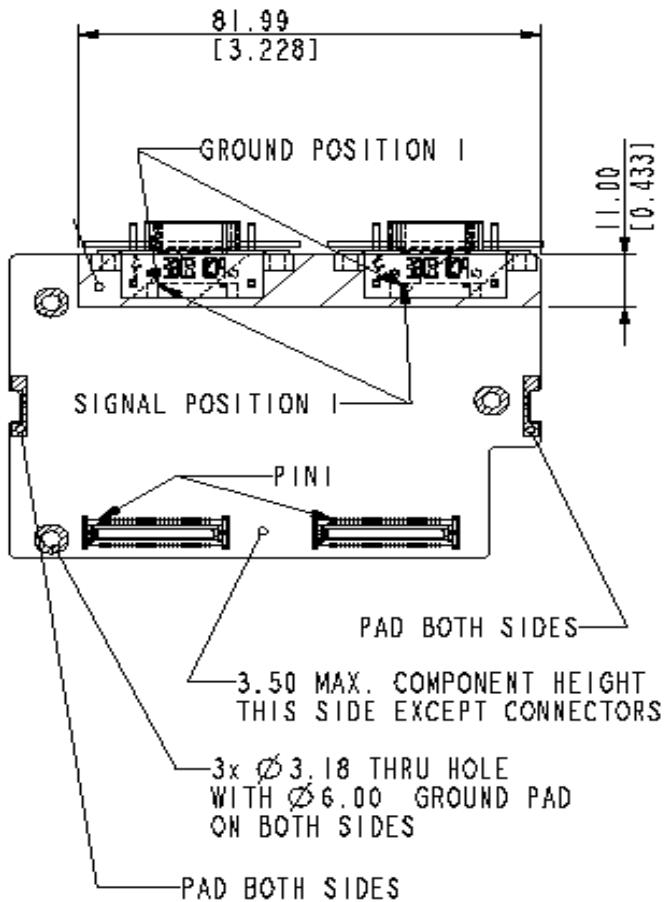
Dual 10 Gb Ethernet I/O Module Dimensions: Top and Side Views
